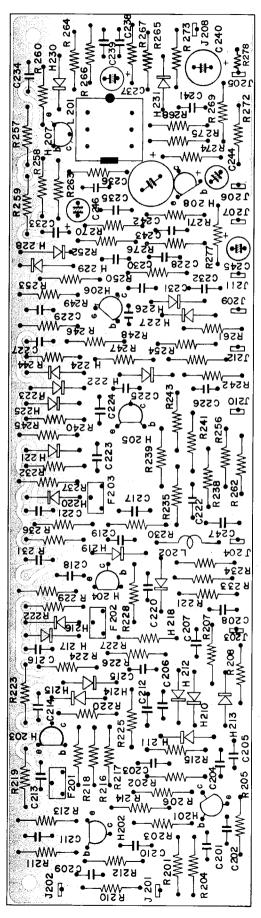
FM IF Amplifier Assembly P200 Component Locations
